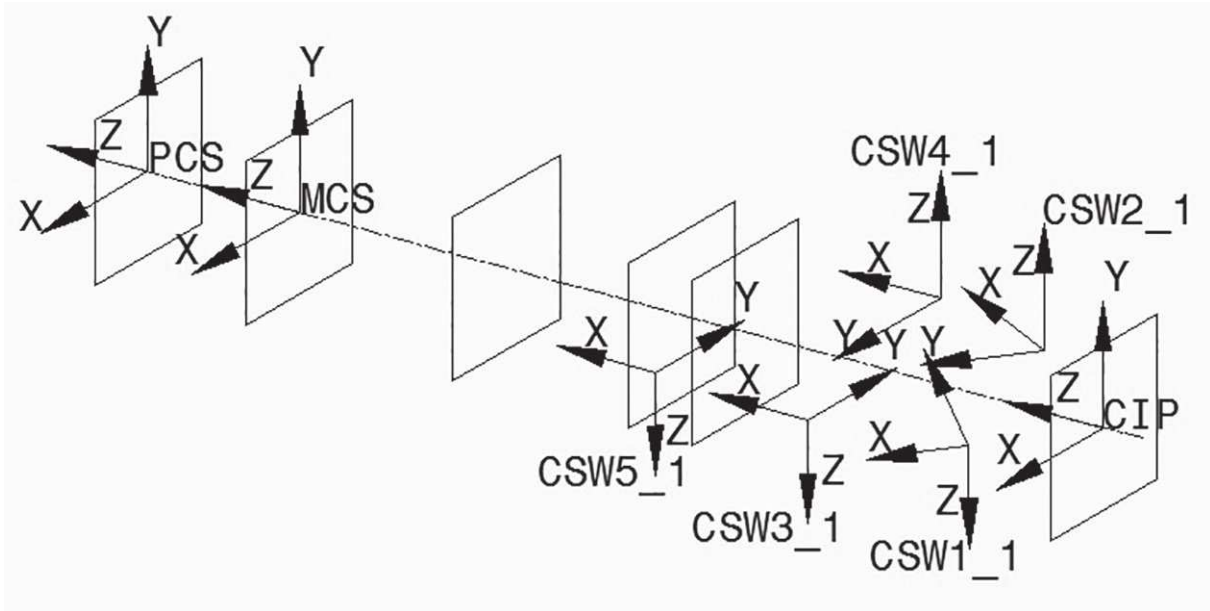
Location of CSWs of a ball-nosed straight end mill
